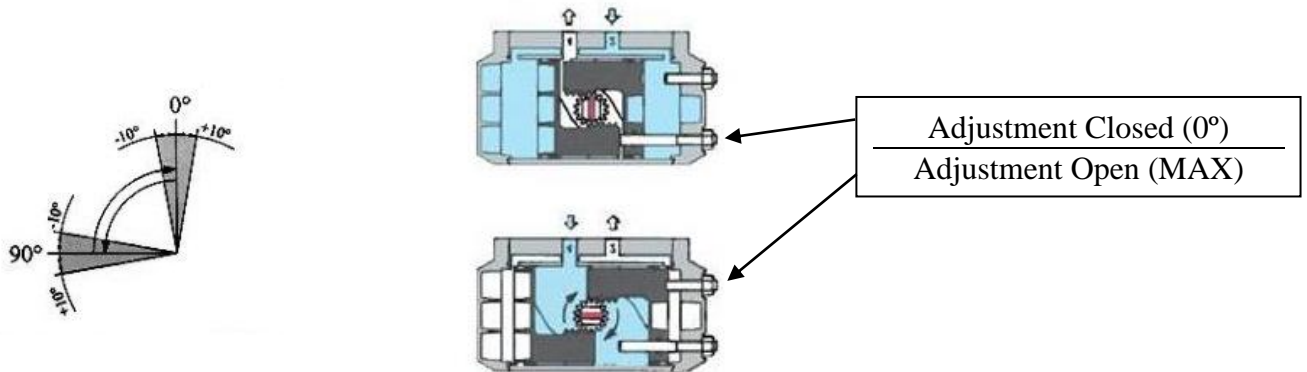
b shows an actuator in the normal position (closed) with the pinion flats and the indicator - drive milling perpendicular to the body
